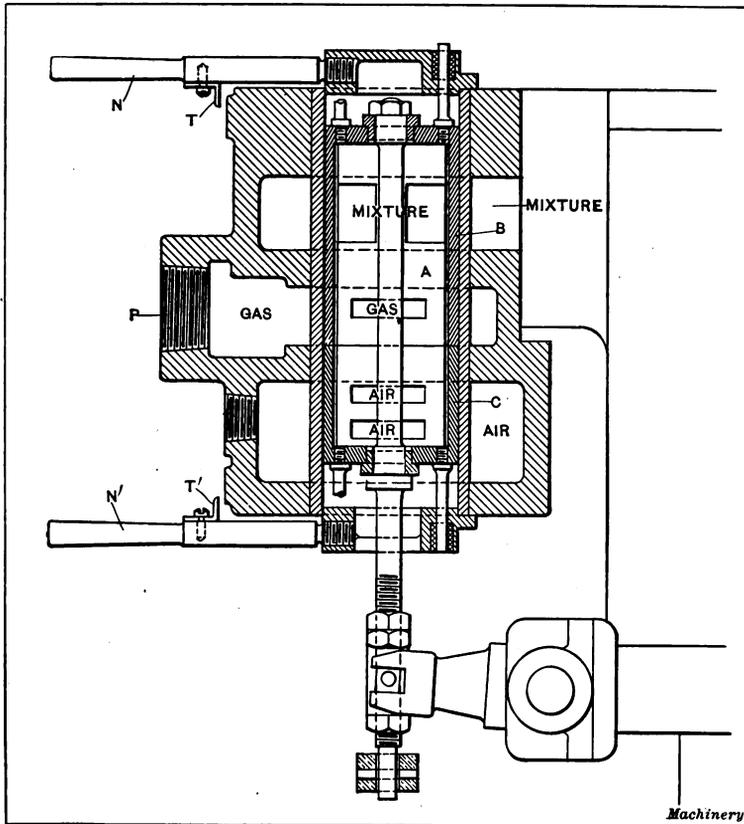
Mixing Valve used on Westinghouse Gas Engine
